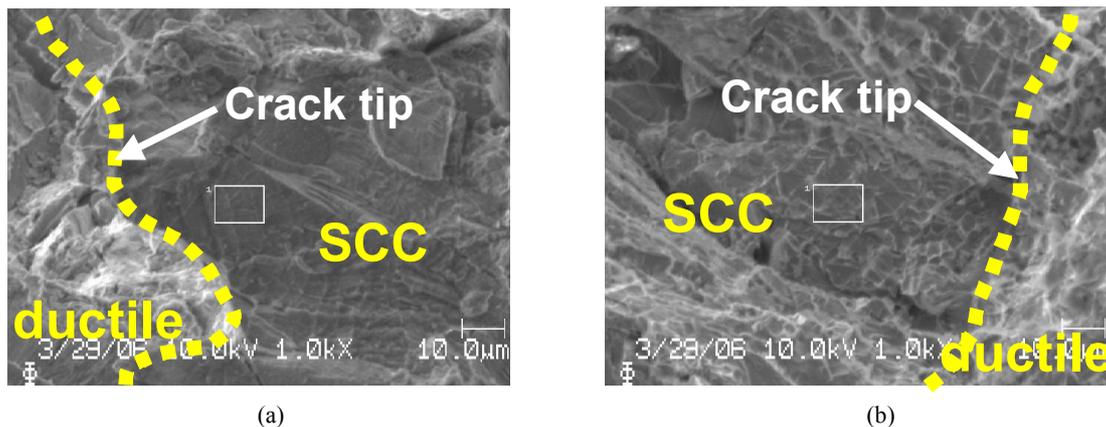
Fracture surfaces showing the crack tips of Alloy 600 specimens tested in (a) H₂O+PbO and H₂O+PbO+NiB(4g/l) at 315°C. AES analysis done in the rectangular regions with white boundary on the fracture surfaces
